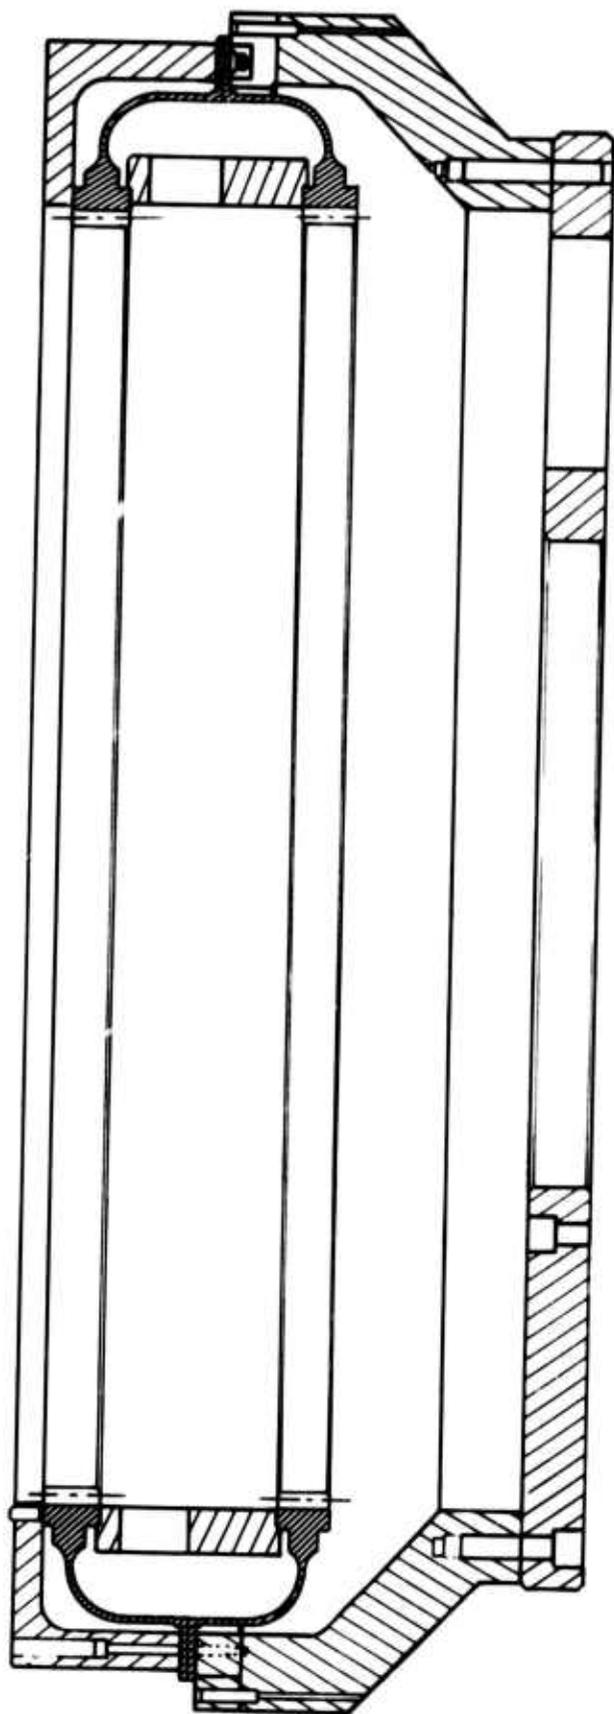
Ring Gear Mounted in Special Machining Fixture.
